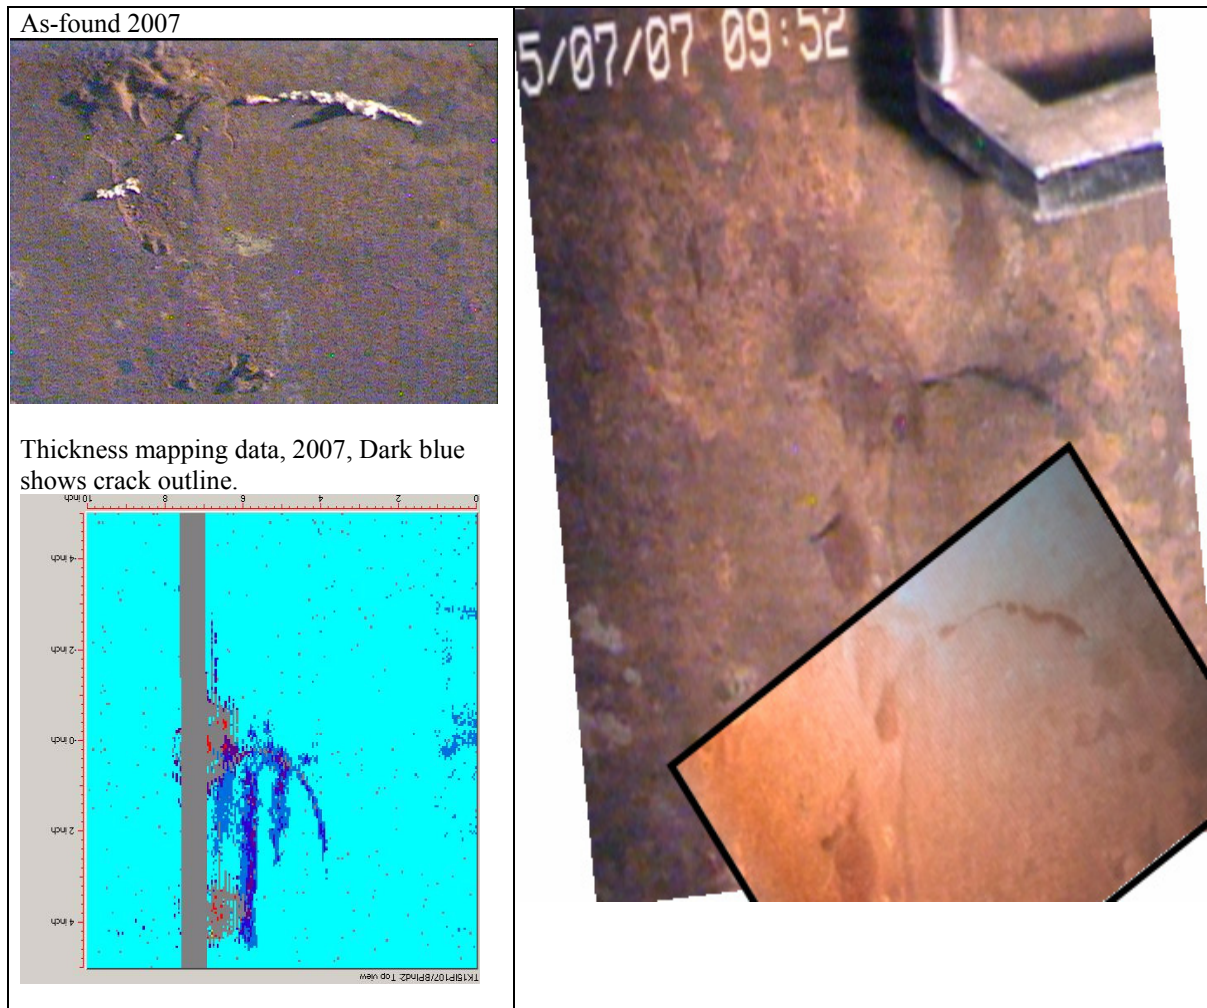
Images of Crack in Vertical Weld at IP55
